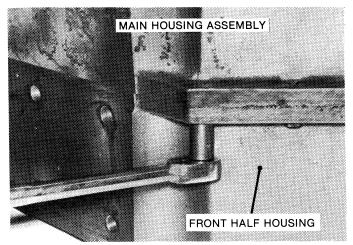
Removing or Installing Main Housing Retaining Screws.
